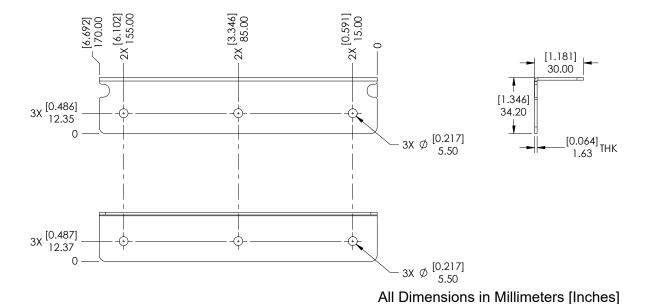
NC-S Mounting Plate Mechanical Drawing
